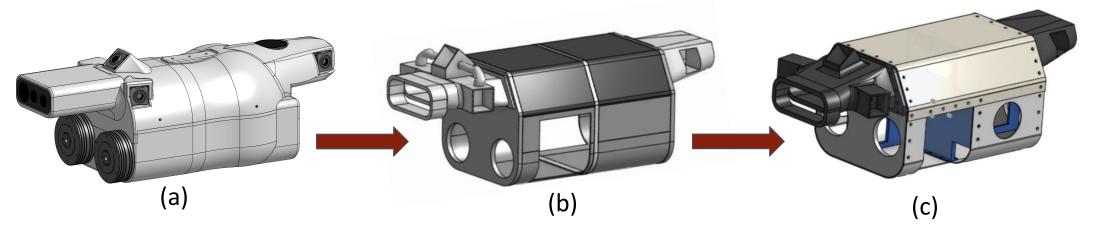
Body design iterations. (a) 3D printed design. (b) Four-piece sheet metal design. (c) Chosen two-piece sheet metal design
